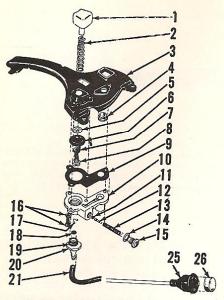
Exploded view of fuel primer pump and associated parts used on most models.
